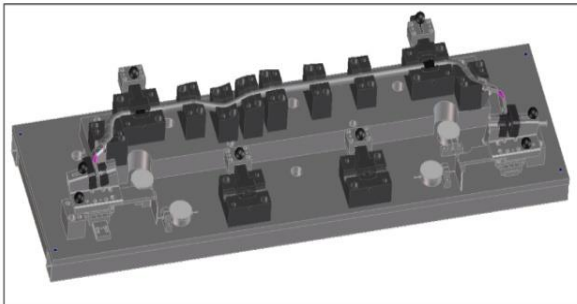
Bending machine for hot extrusion bars (source *TKBS*)
